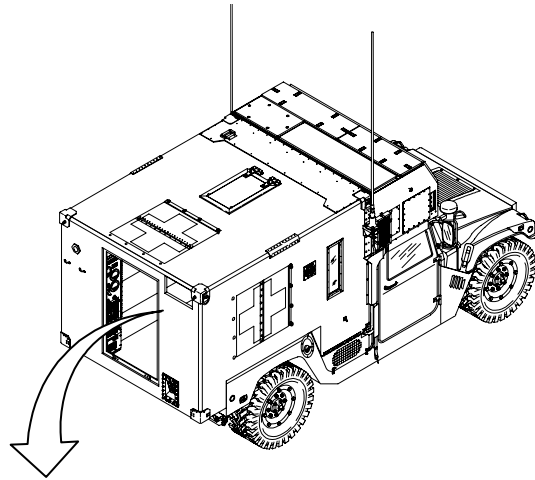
Sound Quilt Assembly Replacement (Sheet 4 of 6)
